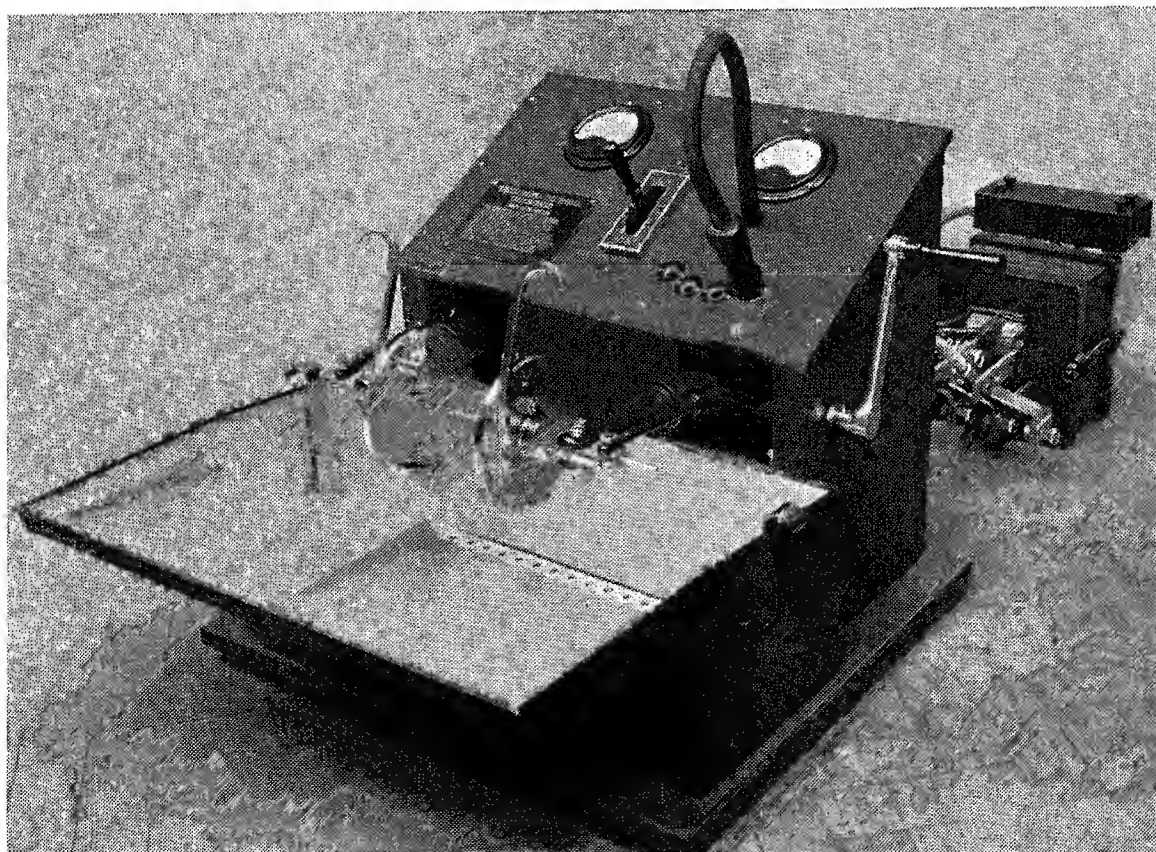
Magnetic crack-detection equipment utilizing superimposed continuous and alternating fields.
